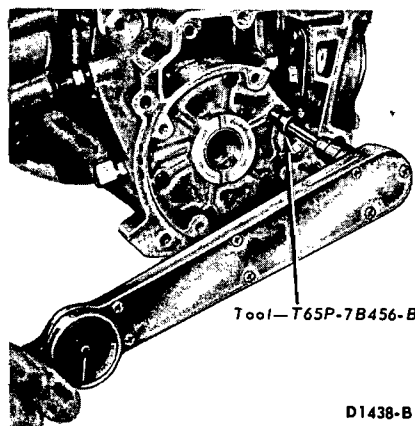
Installing One-Way Clutch Outer Race Attaching Bolt
